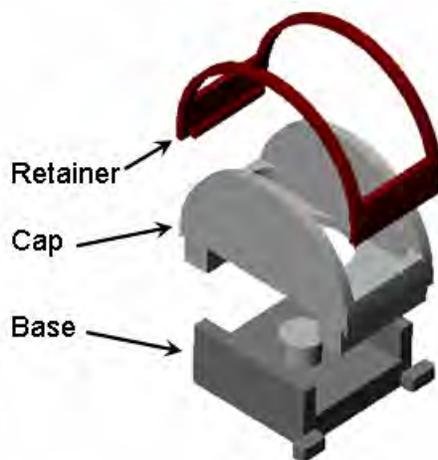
Exploded Schematic View of the XRD Sample Holder (Kapton[®] film not shown) (see Strachan et al. 2003)
